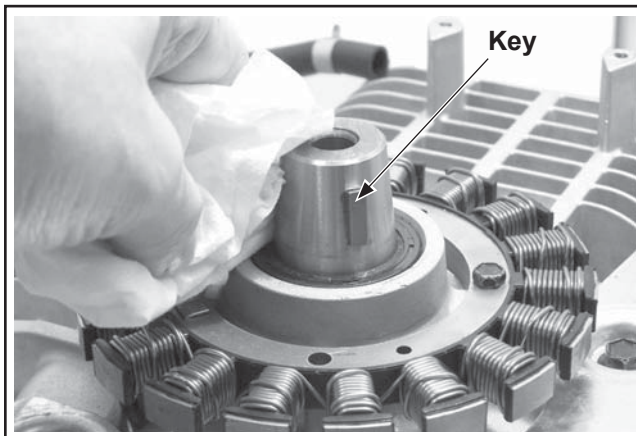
Clean and Dry Taper of Crankshaft, Install Key.
